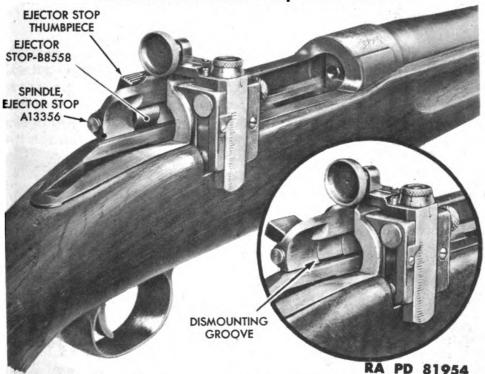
Receiver Section Showing Ejector Stop on U.S. Rifle, Cal. .22, M2 — Locked and Unlocked Positions
